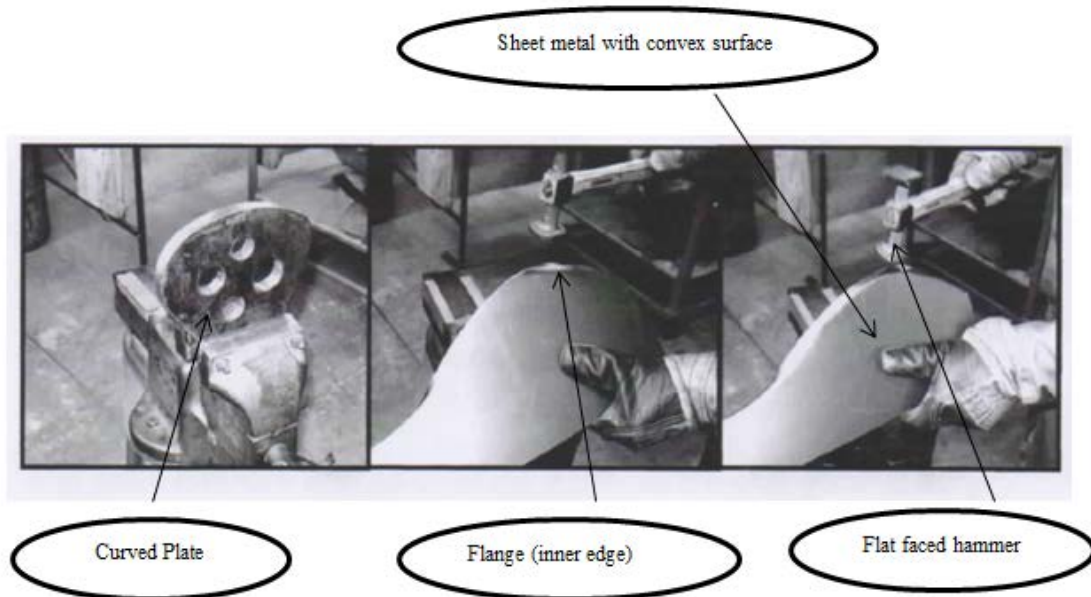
Flat faced hammer to thicken the convex surface
